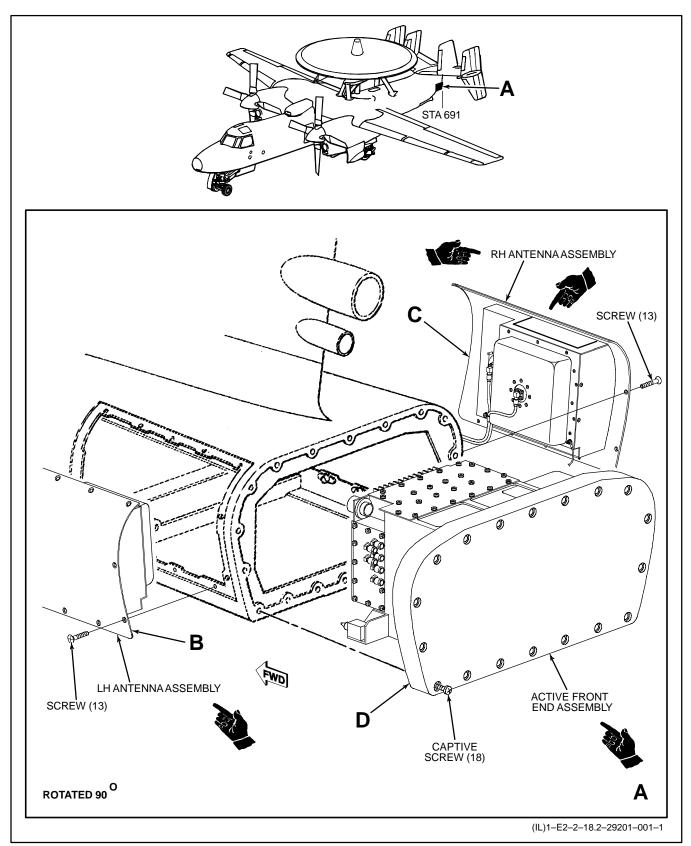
Removal and Installation of Antenna Assembly AS-4522/ALQ-217 (Sheet 1 of 3)
